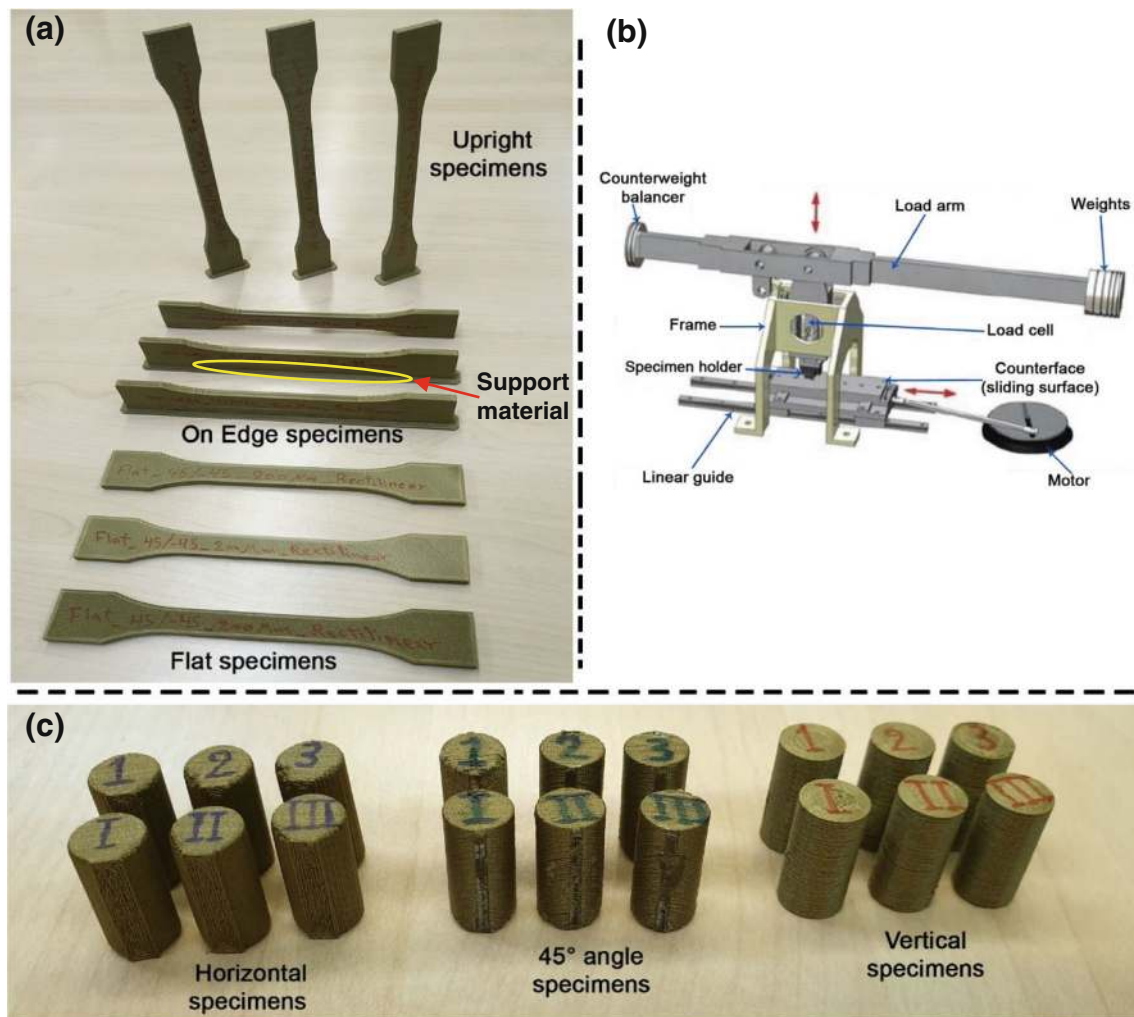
a 3D-printed tensile specimens before performing the test; b the schematic of cylinder-on-plate reciprocating tribometer apparatus [28]; c 3D-printed tribology test specimens
